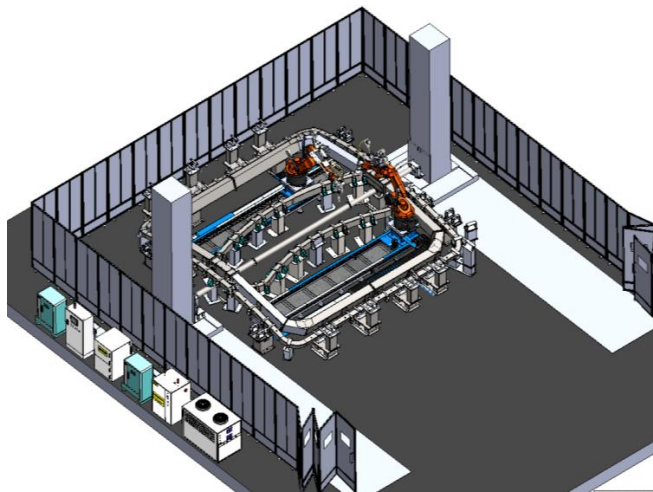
17 The layout of the final laser closure welding workshop
